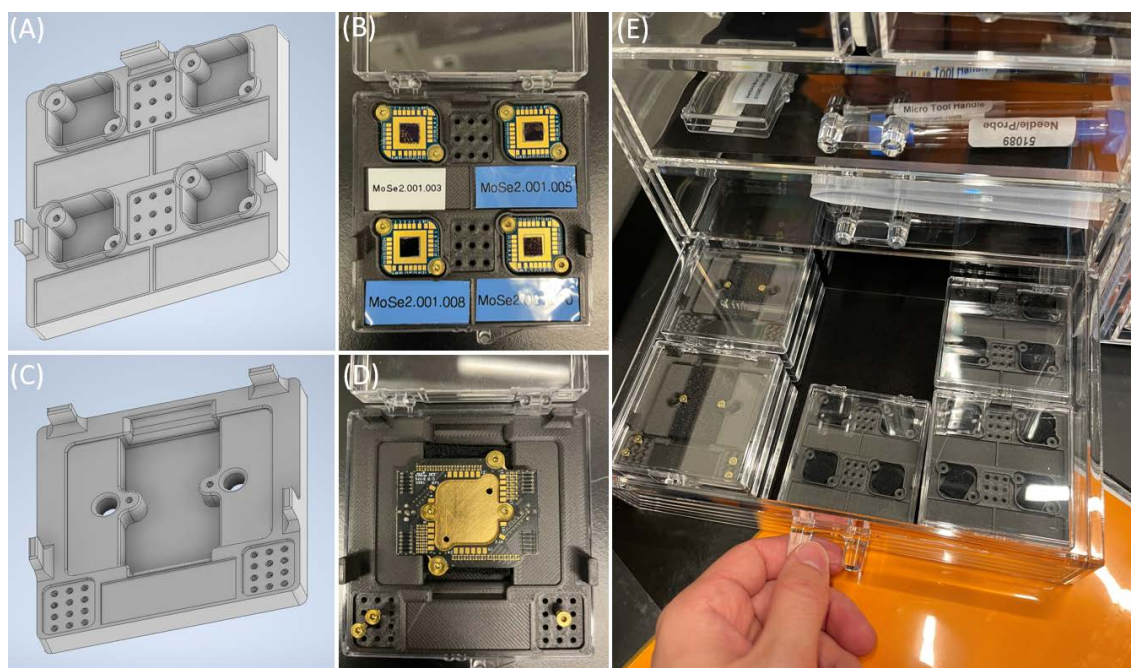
(A) 3D CAD of the Chip Carrier holder. (B) Image of the 3D printed Chip Carrier holder; material: Onyx. It is placed in a clear plastic storage box from Newport. (C) 3D CAD of the Sample Carriage holder. (D) Image of the 3D printed Sample Carriage holder; material: Onyx. It is placed in a clear plastic storage box from Newport. (E) Spare holders can be easily stored away for future use. Holders with samples installed should be placed in one of the desiccator boxes in the lab.
